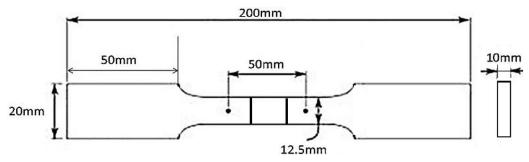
Tensile Test Specimen. (Dimensions in mm).
